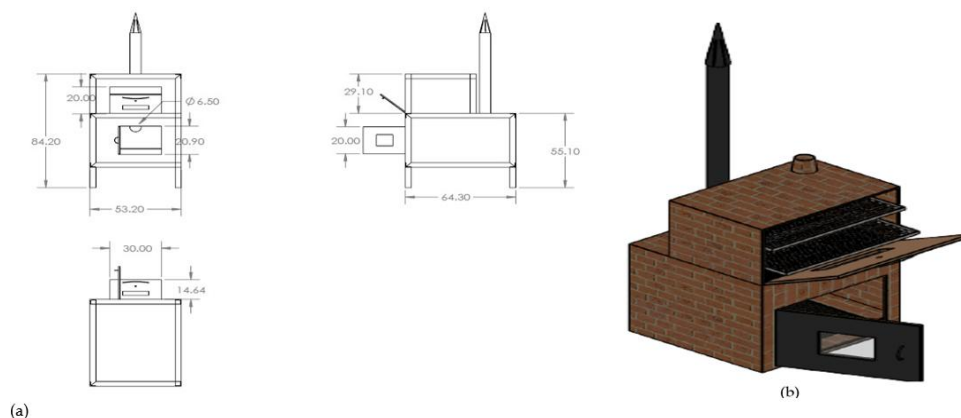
Engineering design (a) and 3D model (b) of the locally fabricated bread oven
